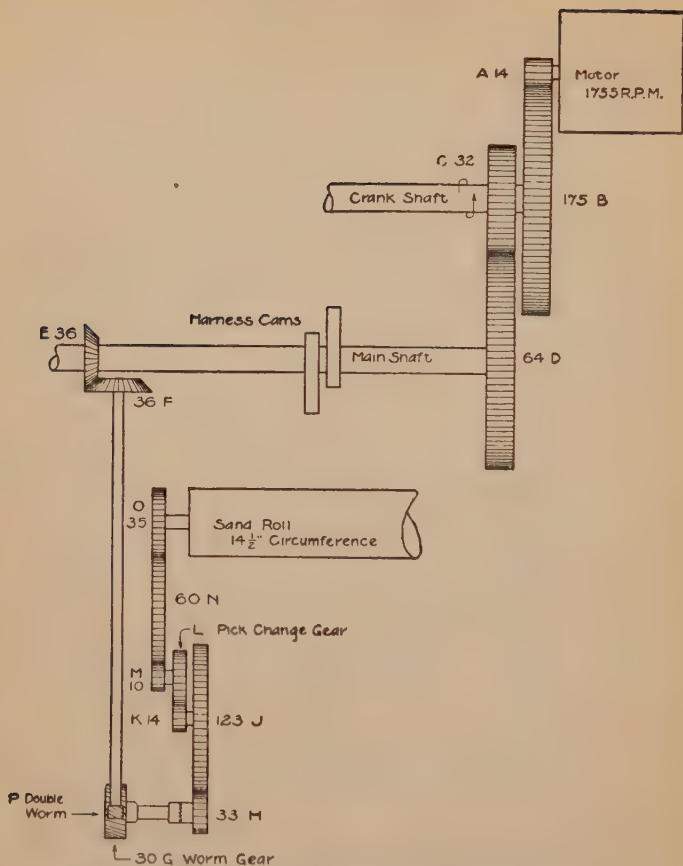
TAKE-UP GEARING OF LOOM WITH
